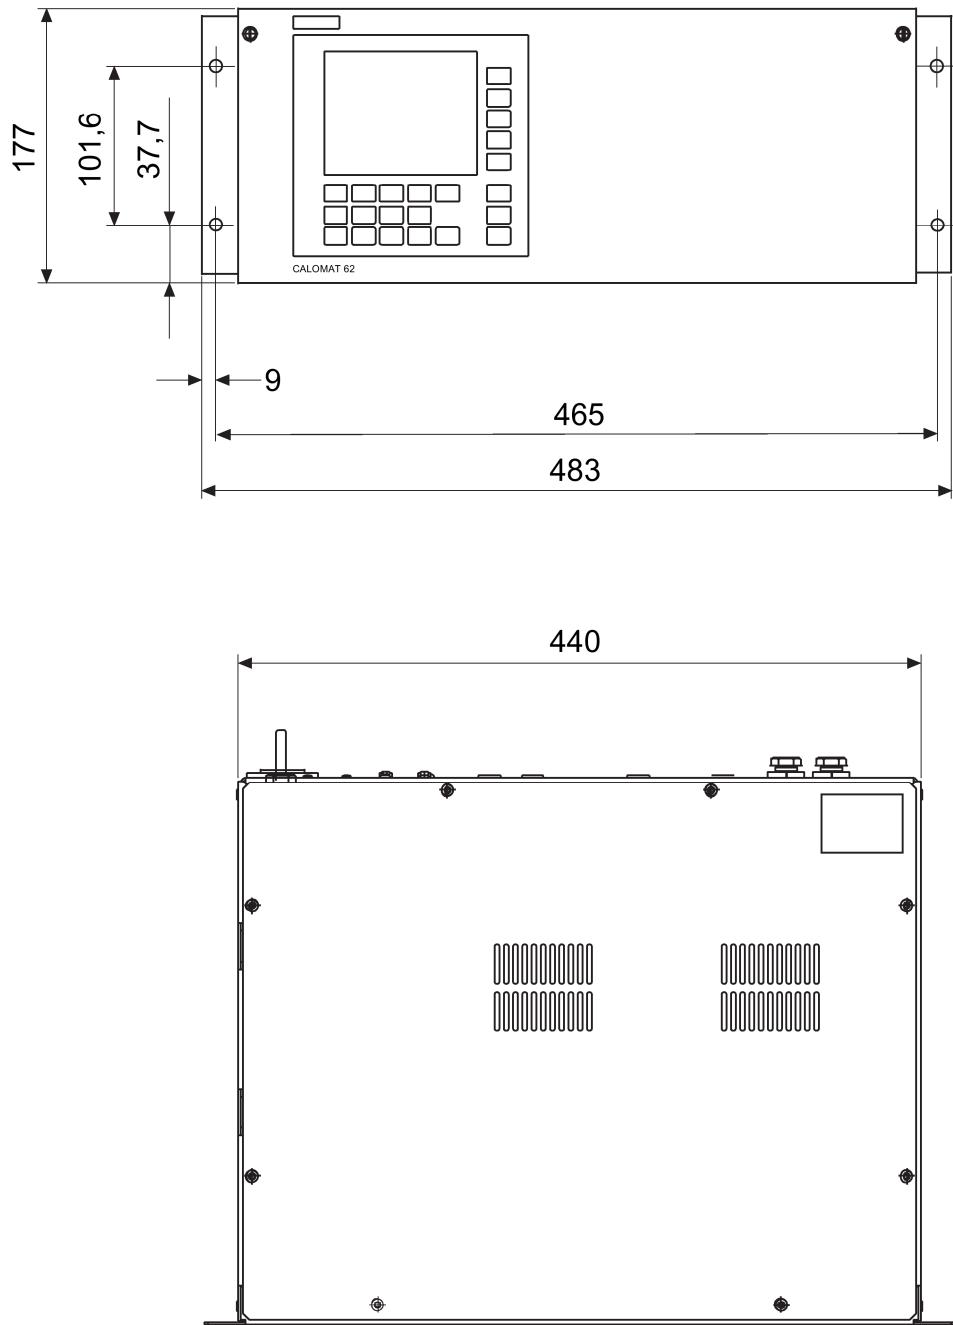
Dimensions for preparing installation of CALOMAT 62E (front view and plan view)
